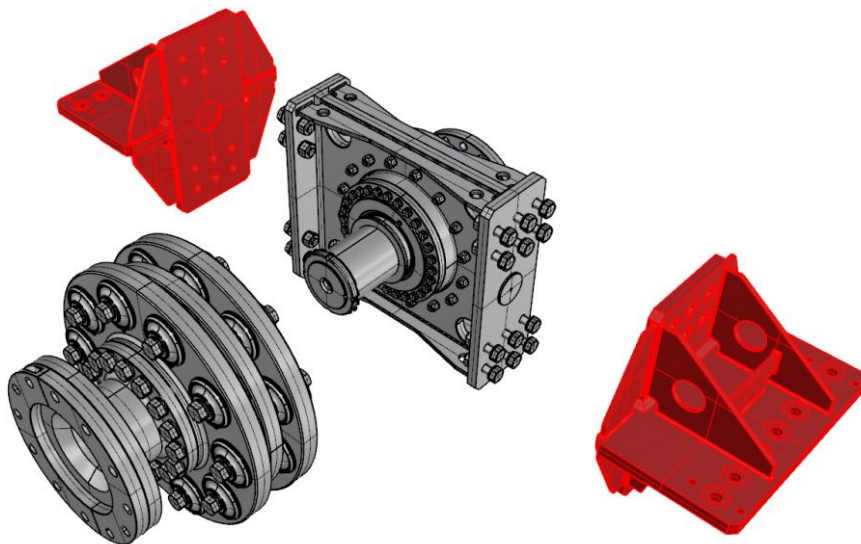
Vulkan's thrust block exploded 3D view. Thrust bearing (middle grey), gear box couplings (forward grey) and supporting elements (sides red). Step file provided by Vulkan Italy.
